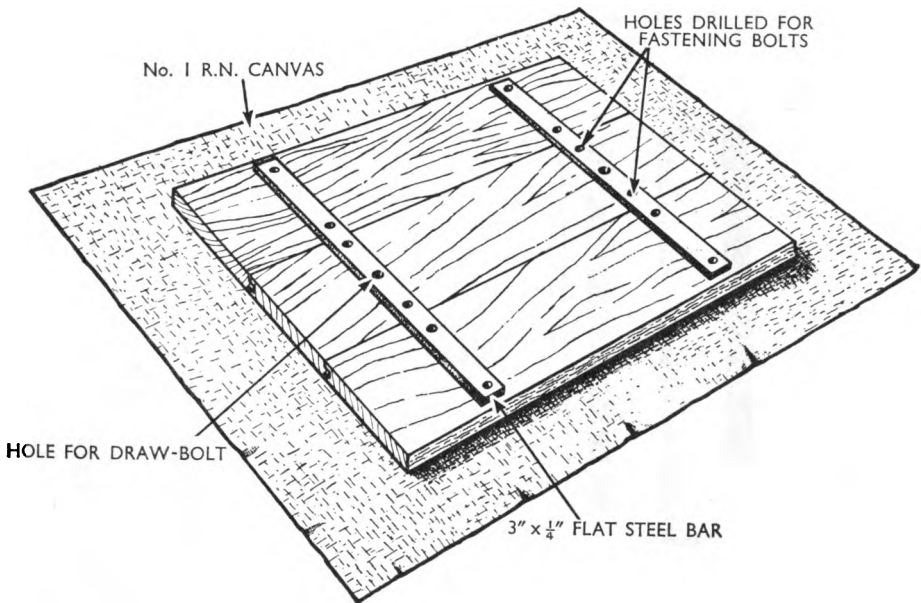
Constructing a simple wooden pad for patching a small hole—first stage
